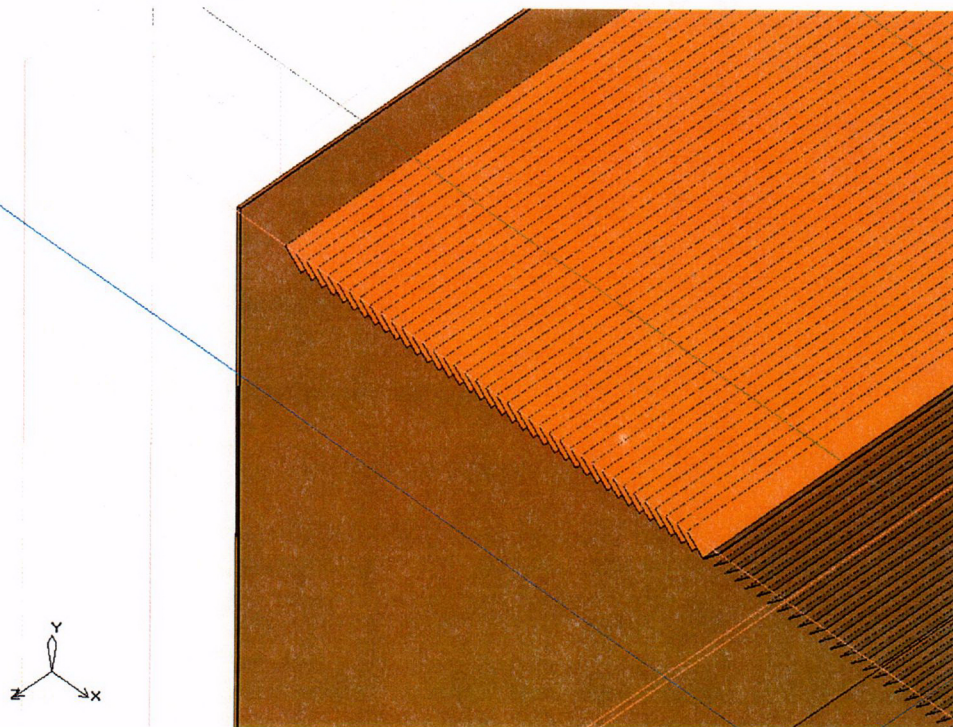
Enlarged View Illustrating Use Of Individual Plates To Model Louvered Heat shield
